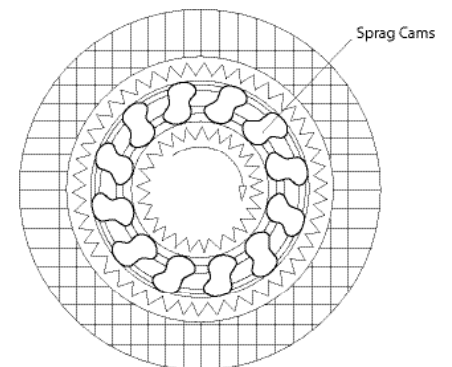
Static friction brake applied. Load attempts to rotate shaft in opposite direction. Brake clutch locks sun gear shaft to friction brake.
